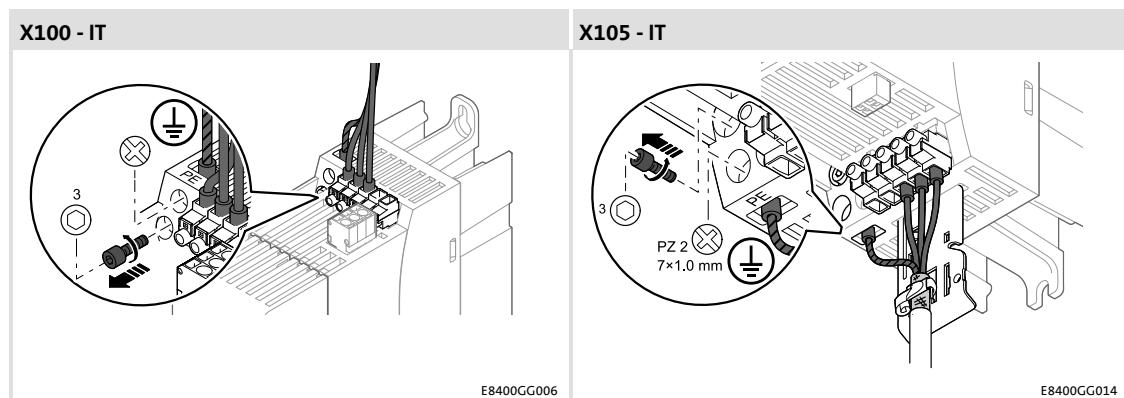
Removal of the contact screws for device sizes 1 ... 3 (on the supply side and on the motor side)
